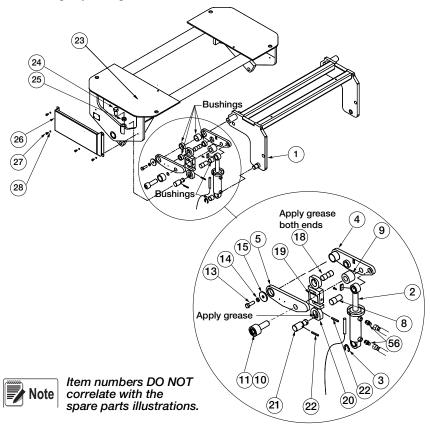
Linkage Assembly/Disassembly (Double Cell Assembly Shown) Tools required:
